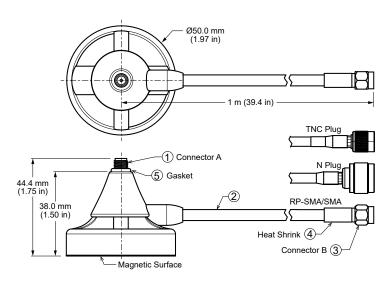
Product Dimensions for the ANT-MAG-RPSF-cccc-1 Cable Assembly
